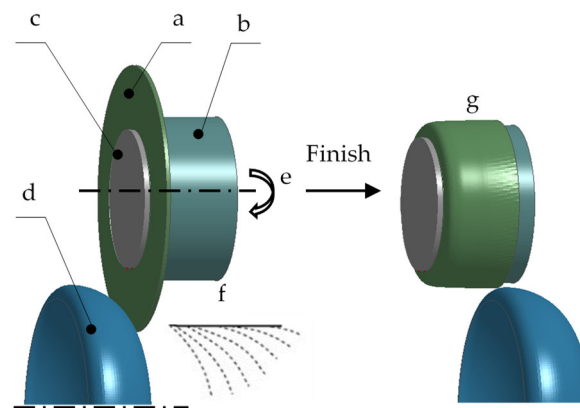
Metal spinning process components: (a) circular plate, (b) mandrel, (c) backplate, (d) roller, (e) rotating mandrel, (f) roller paths, and (g) final part [14].
